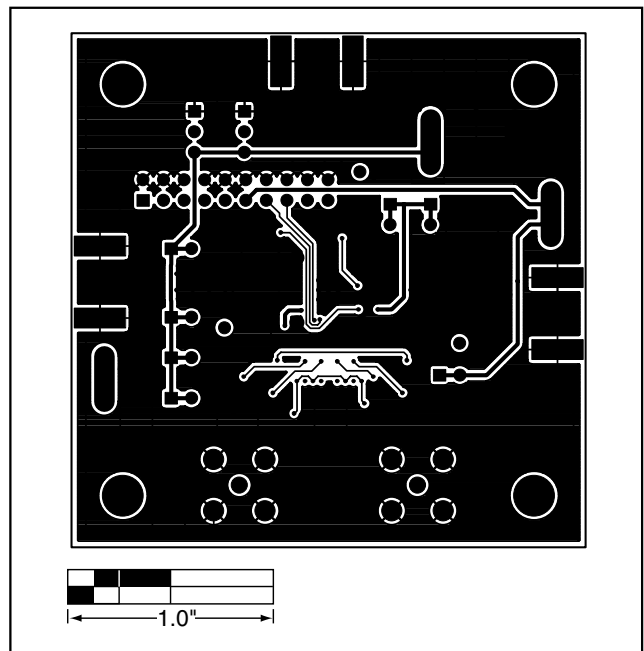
MAX2394/MAX2395 EV Kits PC Board Layout—Secondary Component Side
